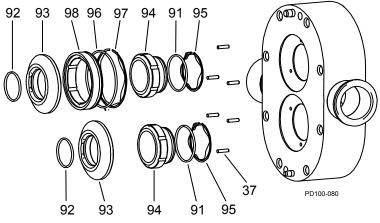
Single (Bottom) and Double (Top) Mechanical Seal
